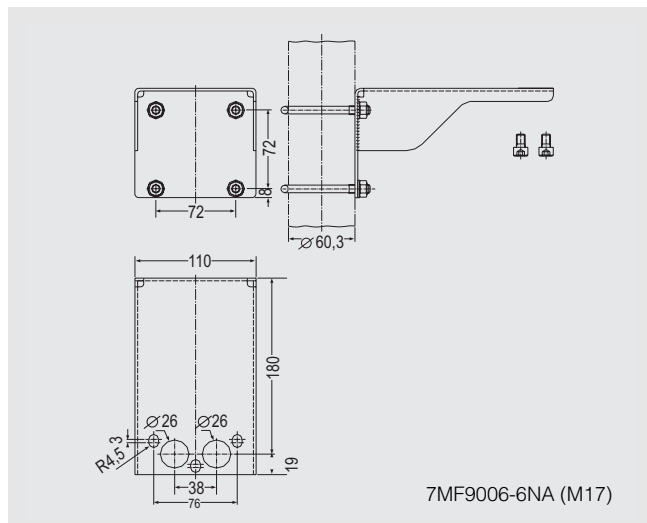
/102 Mount. bracket for three-spindle valve manifolds, dimensions
